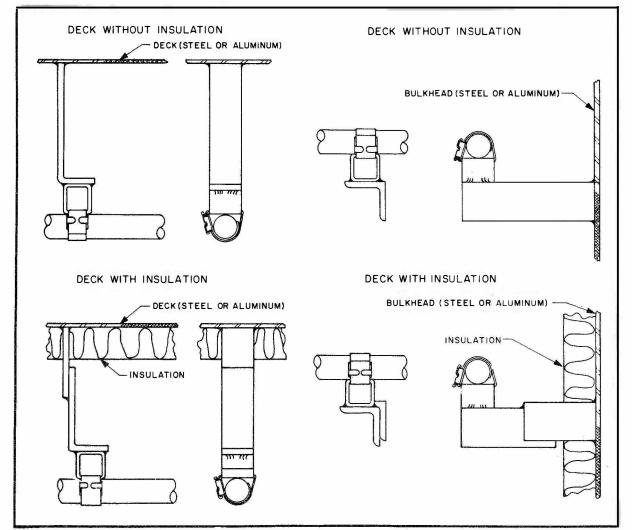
Single Cables Away From Steel or Aluminum Decks and Bulkheads ORIGINAL 4-7-5 INTERCONNECTION CABLING AND WIRING
